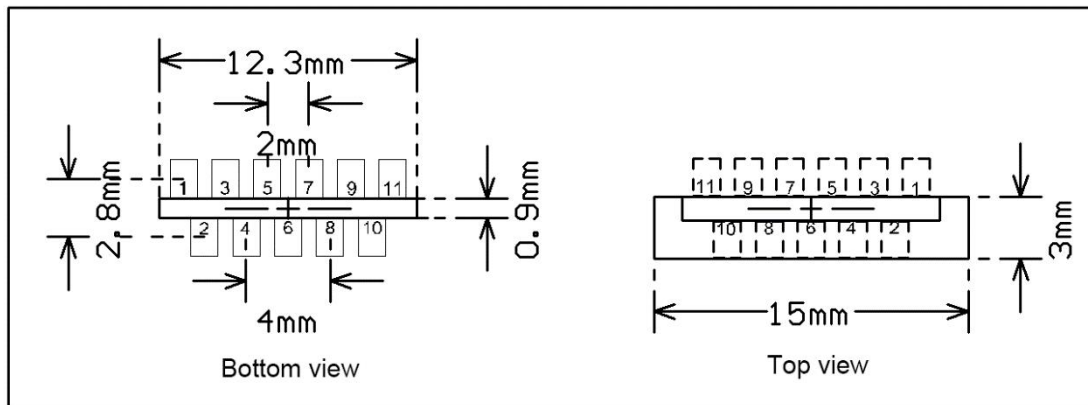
Top and bottom views of the PCB to which WBR2 applies
